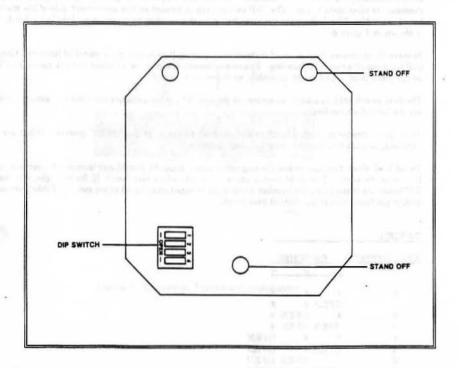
Position of Dip Switch on PC Board Assembly (M17242)
